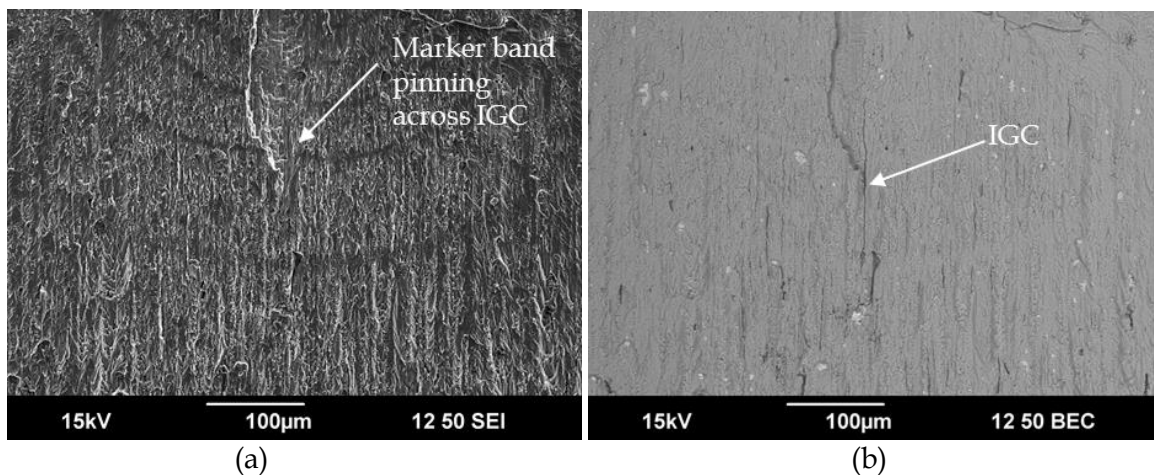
Fracture surface of coupon P3-IG-49 showing ‘pinning’ in the marker band each side of the IGC strike using a) secondary electron and b) back scattered imaging
